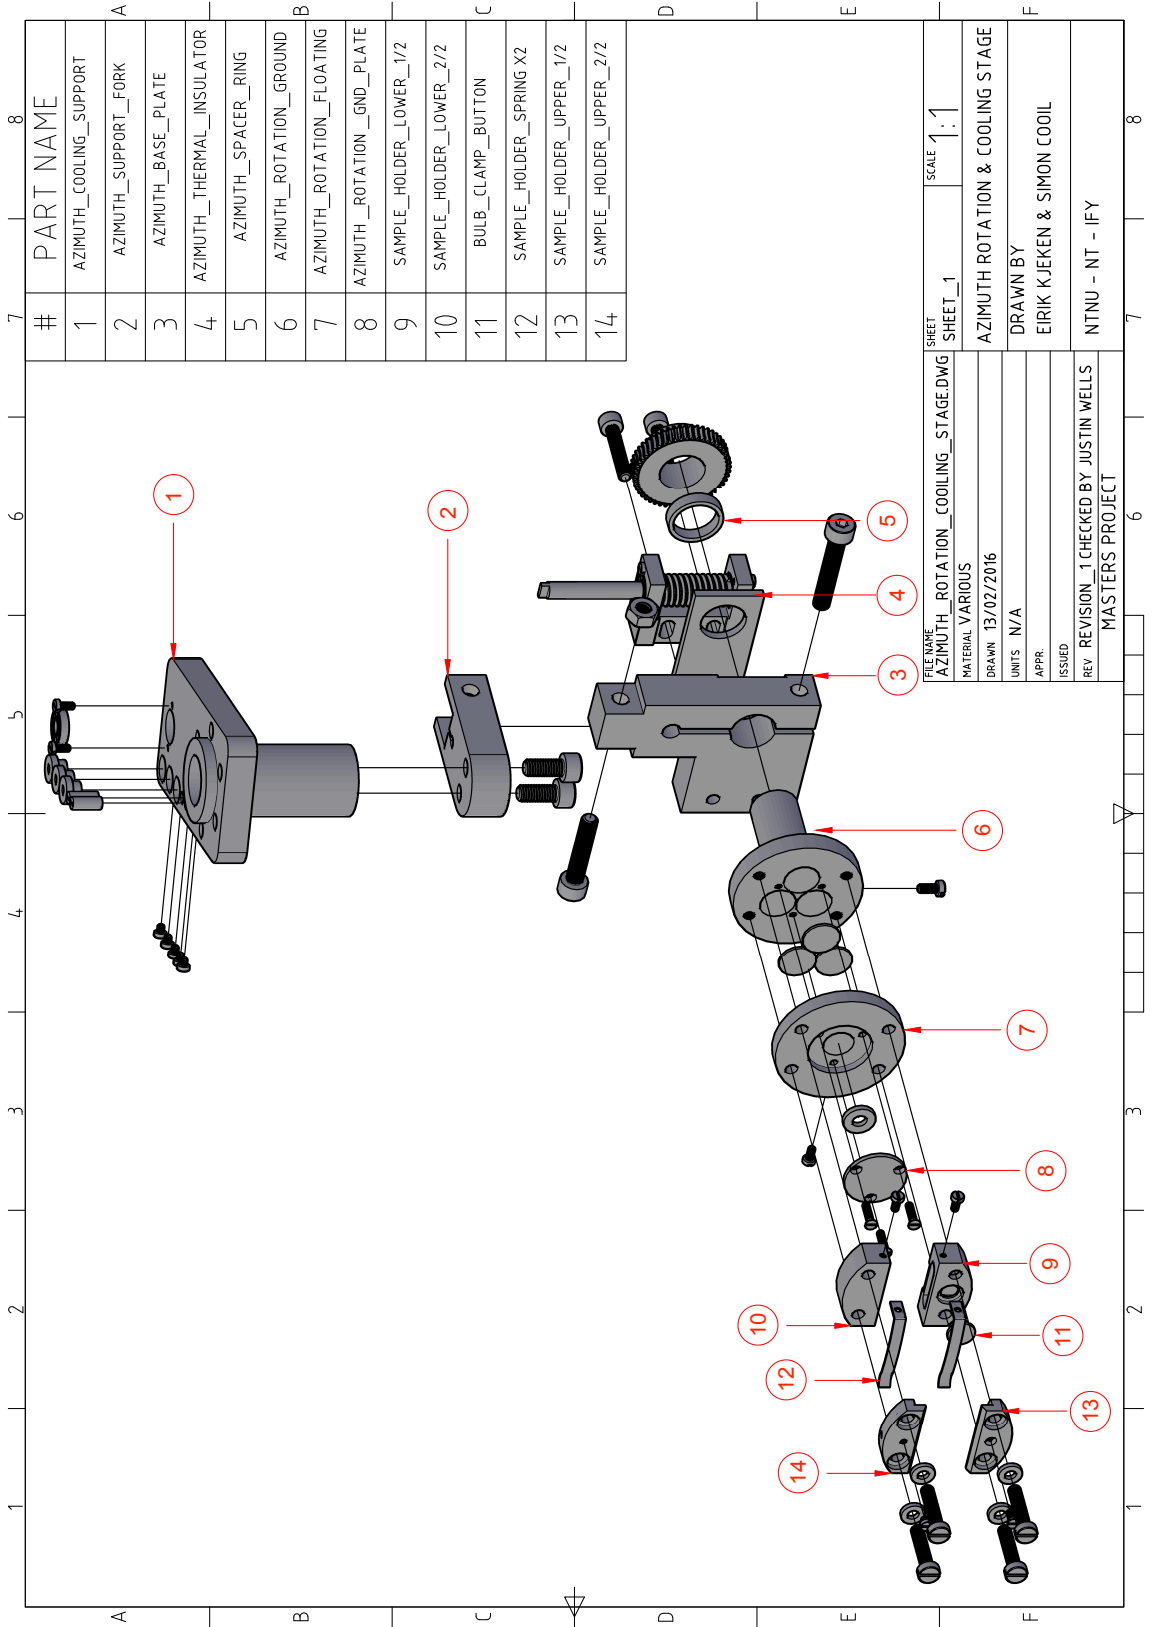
Exploded view of the sample stage design with the manufactured components numbered and named.
